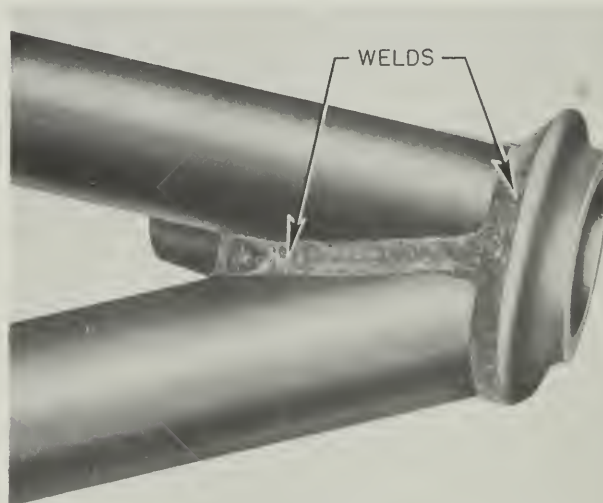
Typical Arc-Welded Engine Mount Joint
